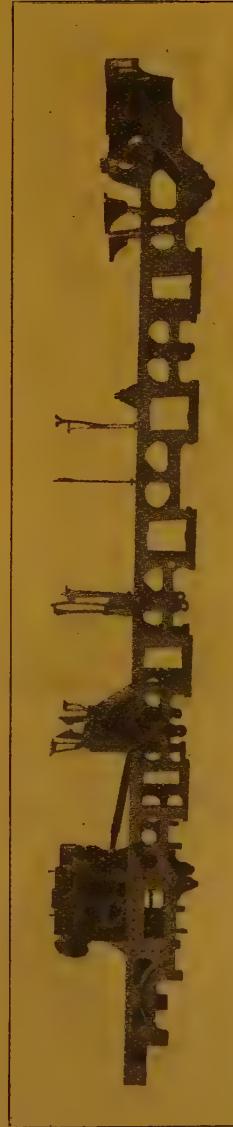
Bar framing with inside cylinder and boiler mountings for 2-10-0 type engines.
